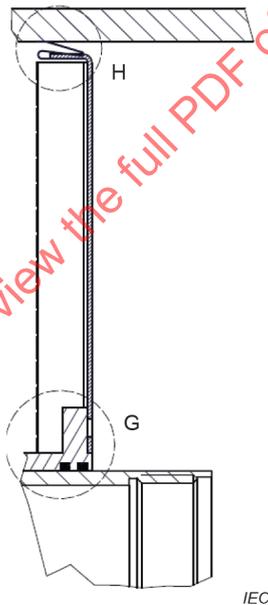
Crosscut of plane shortening housing and tube-in-tube
